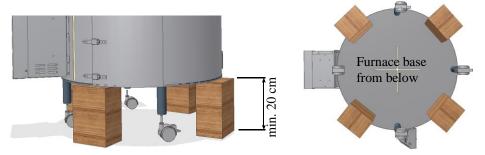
Example: Assembling castors on furnaces over 50 kg (similar to picture)
